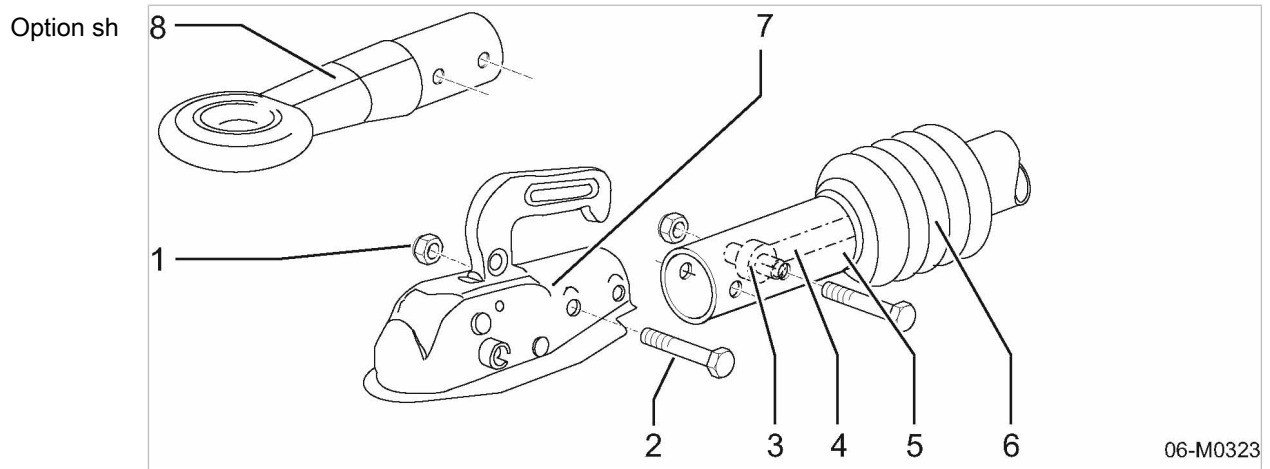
Changing the towing eye (fixed height towbar, USA chassis version)
